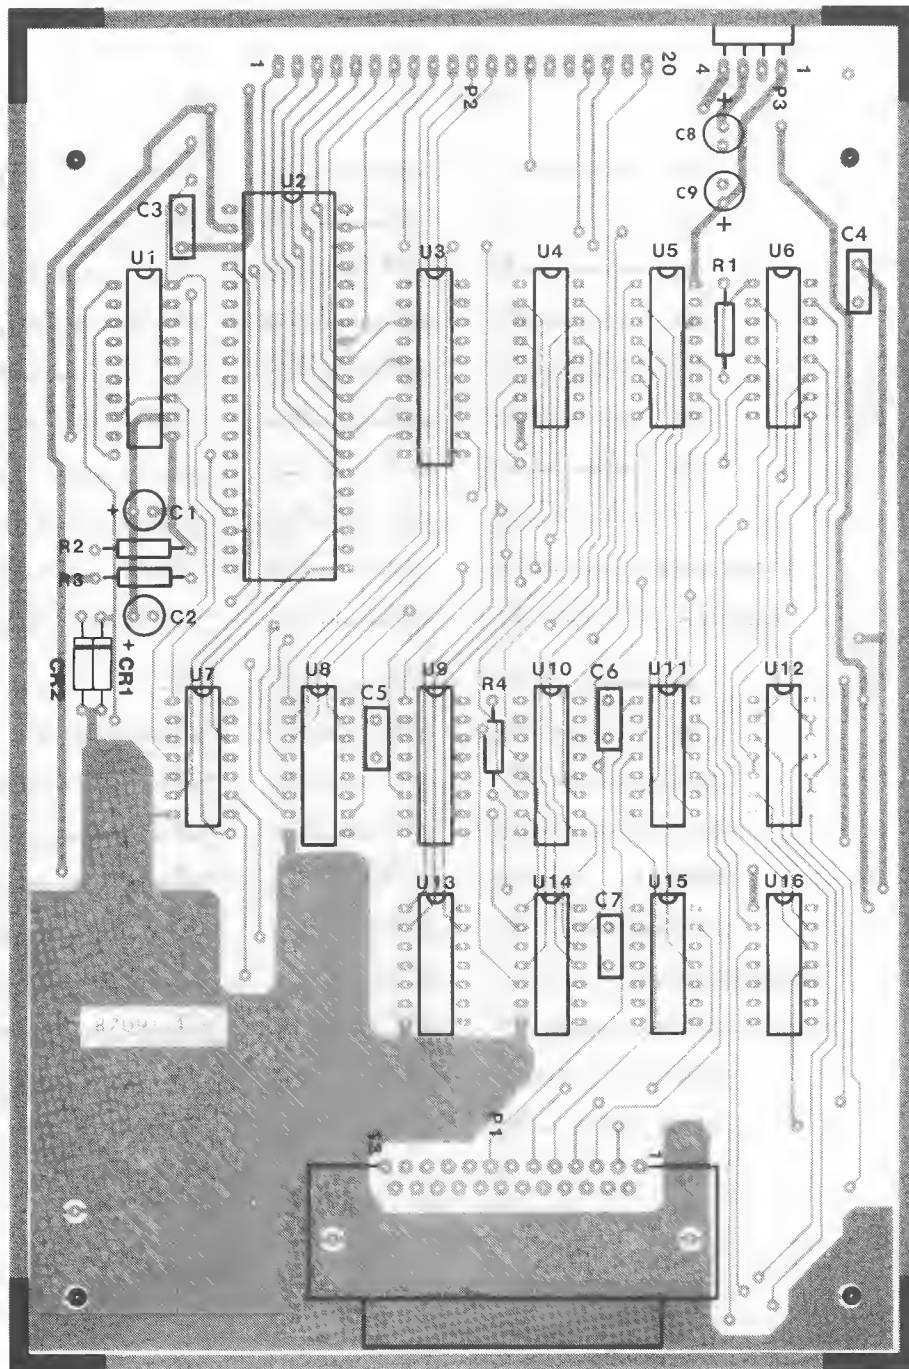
RS-232C PC BOARD – COMPONENT SIDE
